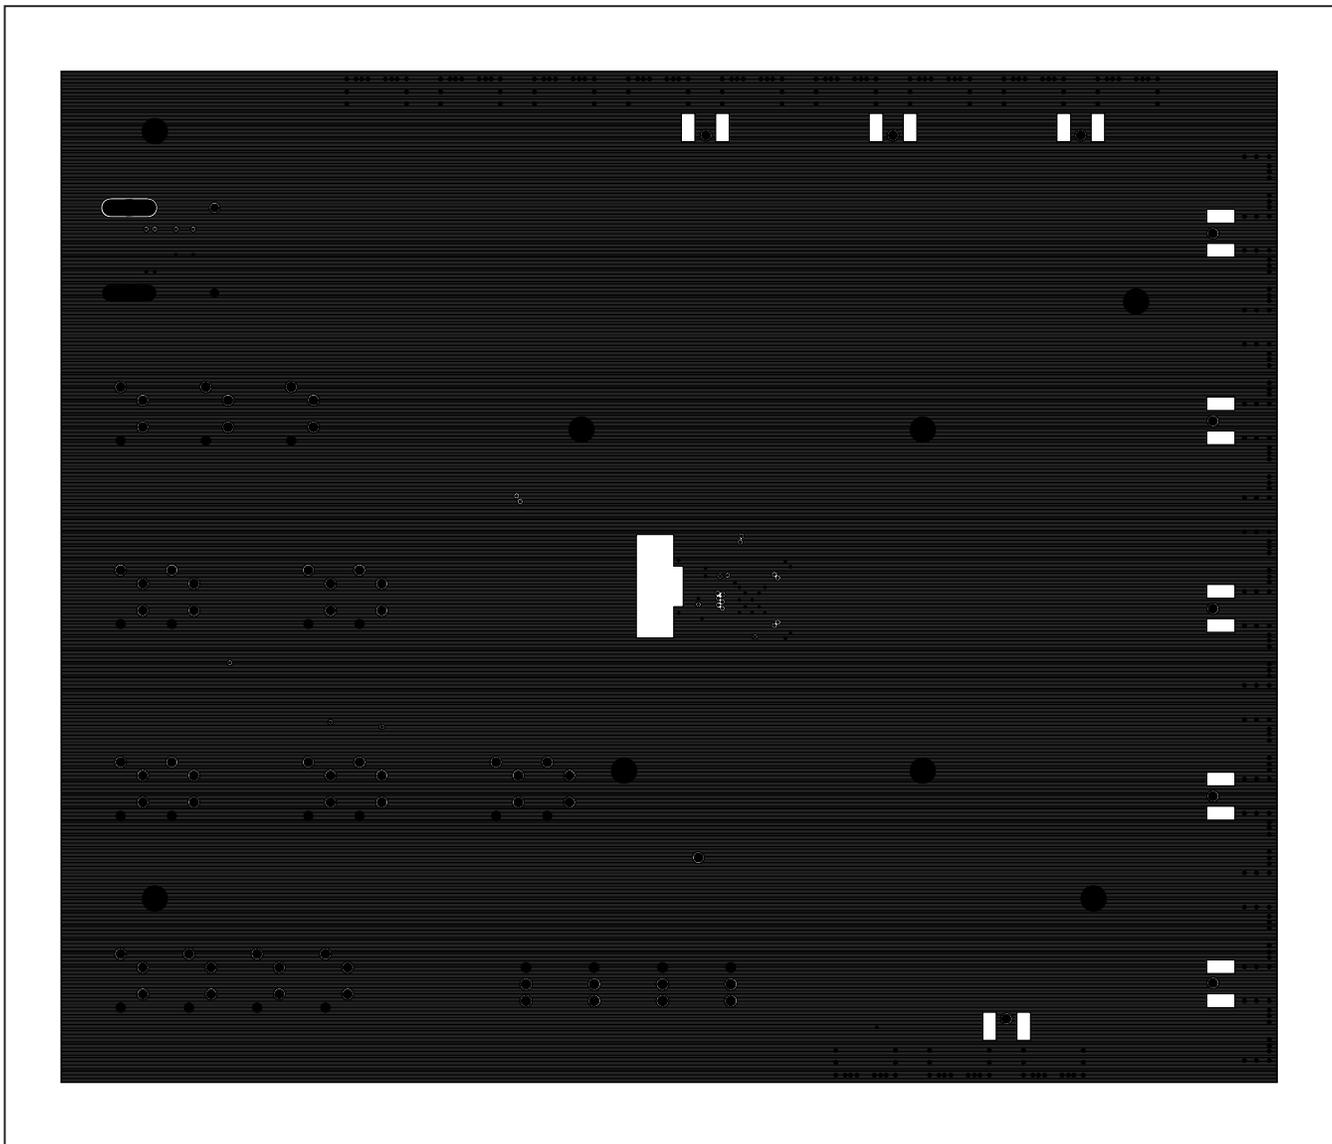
MAX3639 EV Kit PCB Layout—Ground Plane
